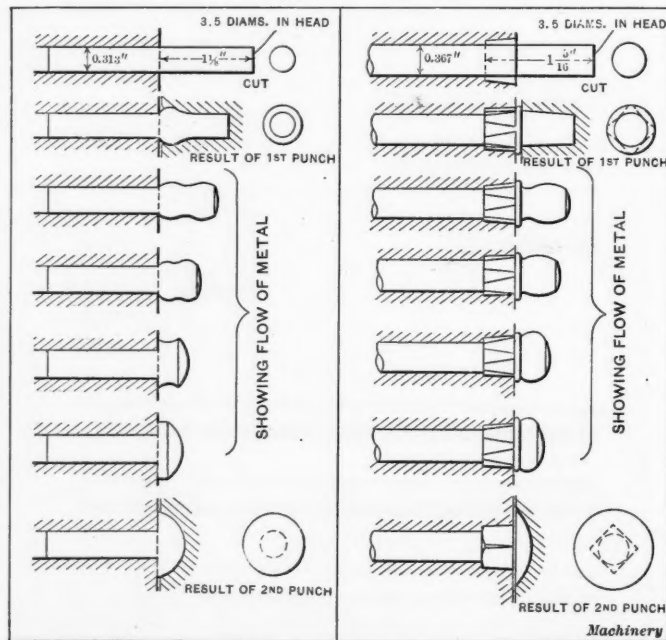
Evolution of Screw Blanks made on Double-stroke Cold-headers
